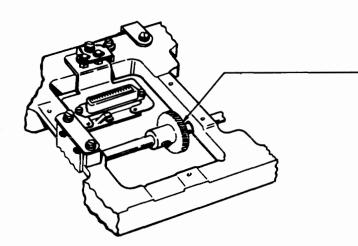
Intermediate Gear - Multicontact Single Mounting Bases
